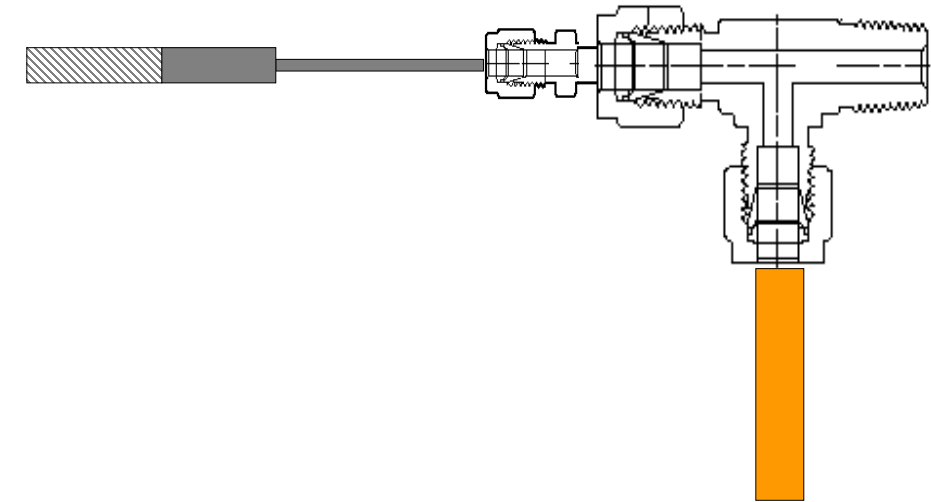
Tee-fitting with thermocouple and copper tubing installed
